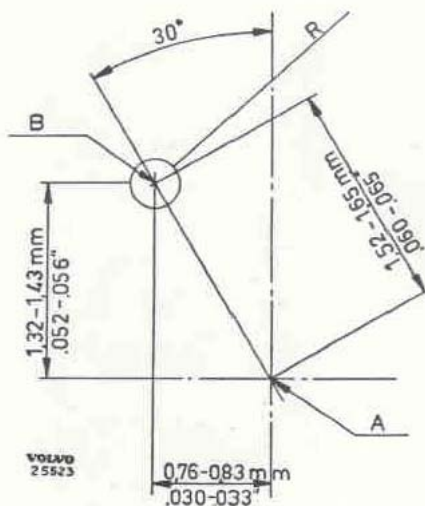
Eccentricity for rear lining of front wheel, riveted type.
